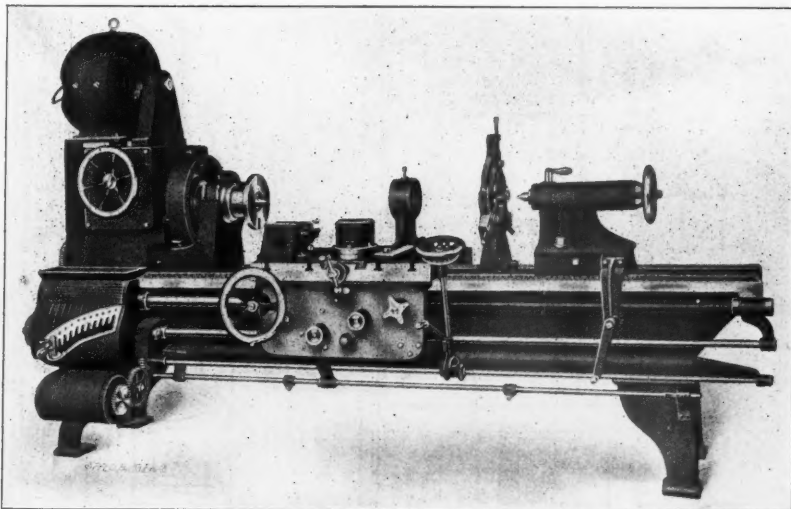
The Hendy 24-in. Lathe as Fitted with Crocker-Wheeler Drive.
